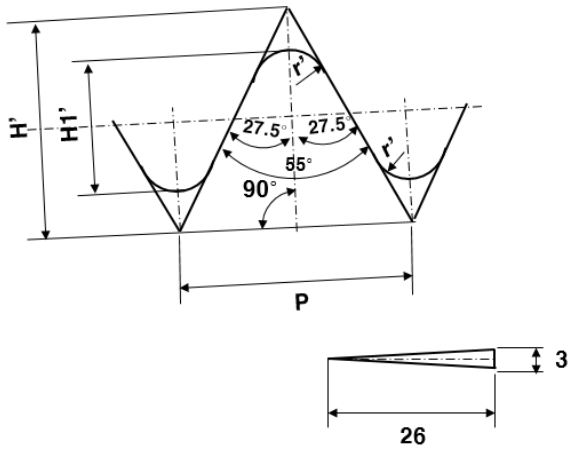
Shape of taper screw thread regarding to Korean Industrial Standards (KS B 6214 : 2009)
